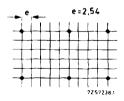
Hole pattern for mounting on a printed-wiring board, hole diameter 1,3 + 0,1 mm.
